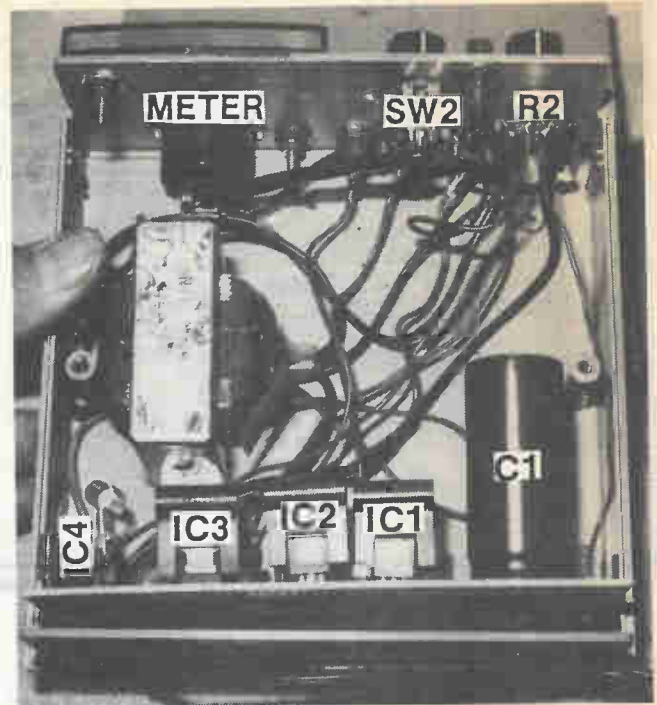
Top view of the completely wired unit. Double check all wiring before testing the power supply sources.
